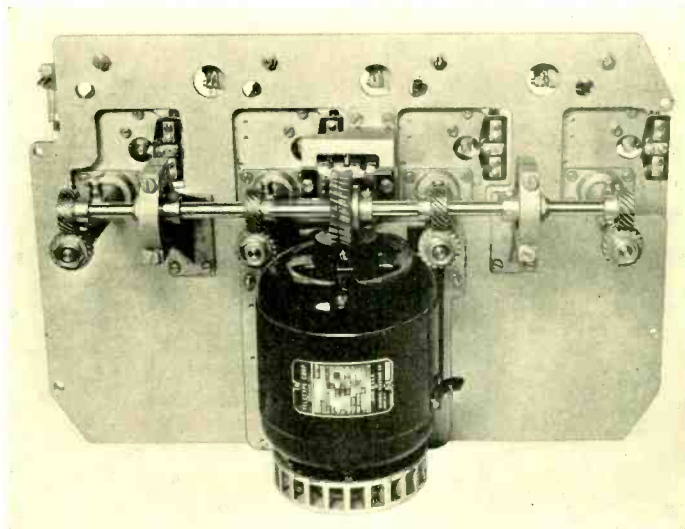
A single motor drives the four repeater elements of an equipment unit through spiral gears and a countershaft
